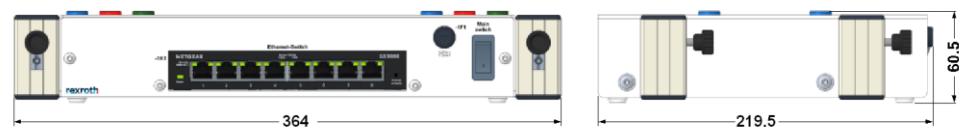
Dimensional sheet of the basic module TS-AC B1-M2-1X (in mm)
